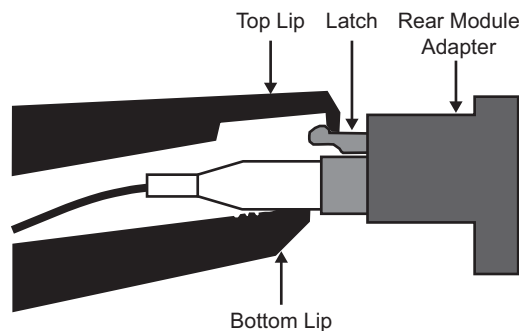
Positioning the Optic Cable Tool — Single-Latch Connector
